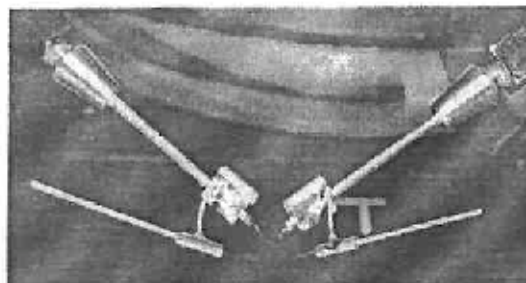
Ground fixture assembly GF-A: clamp, flexible wire and nozzle including 0.5 mm tungsten needle.
